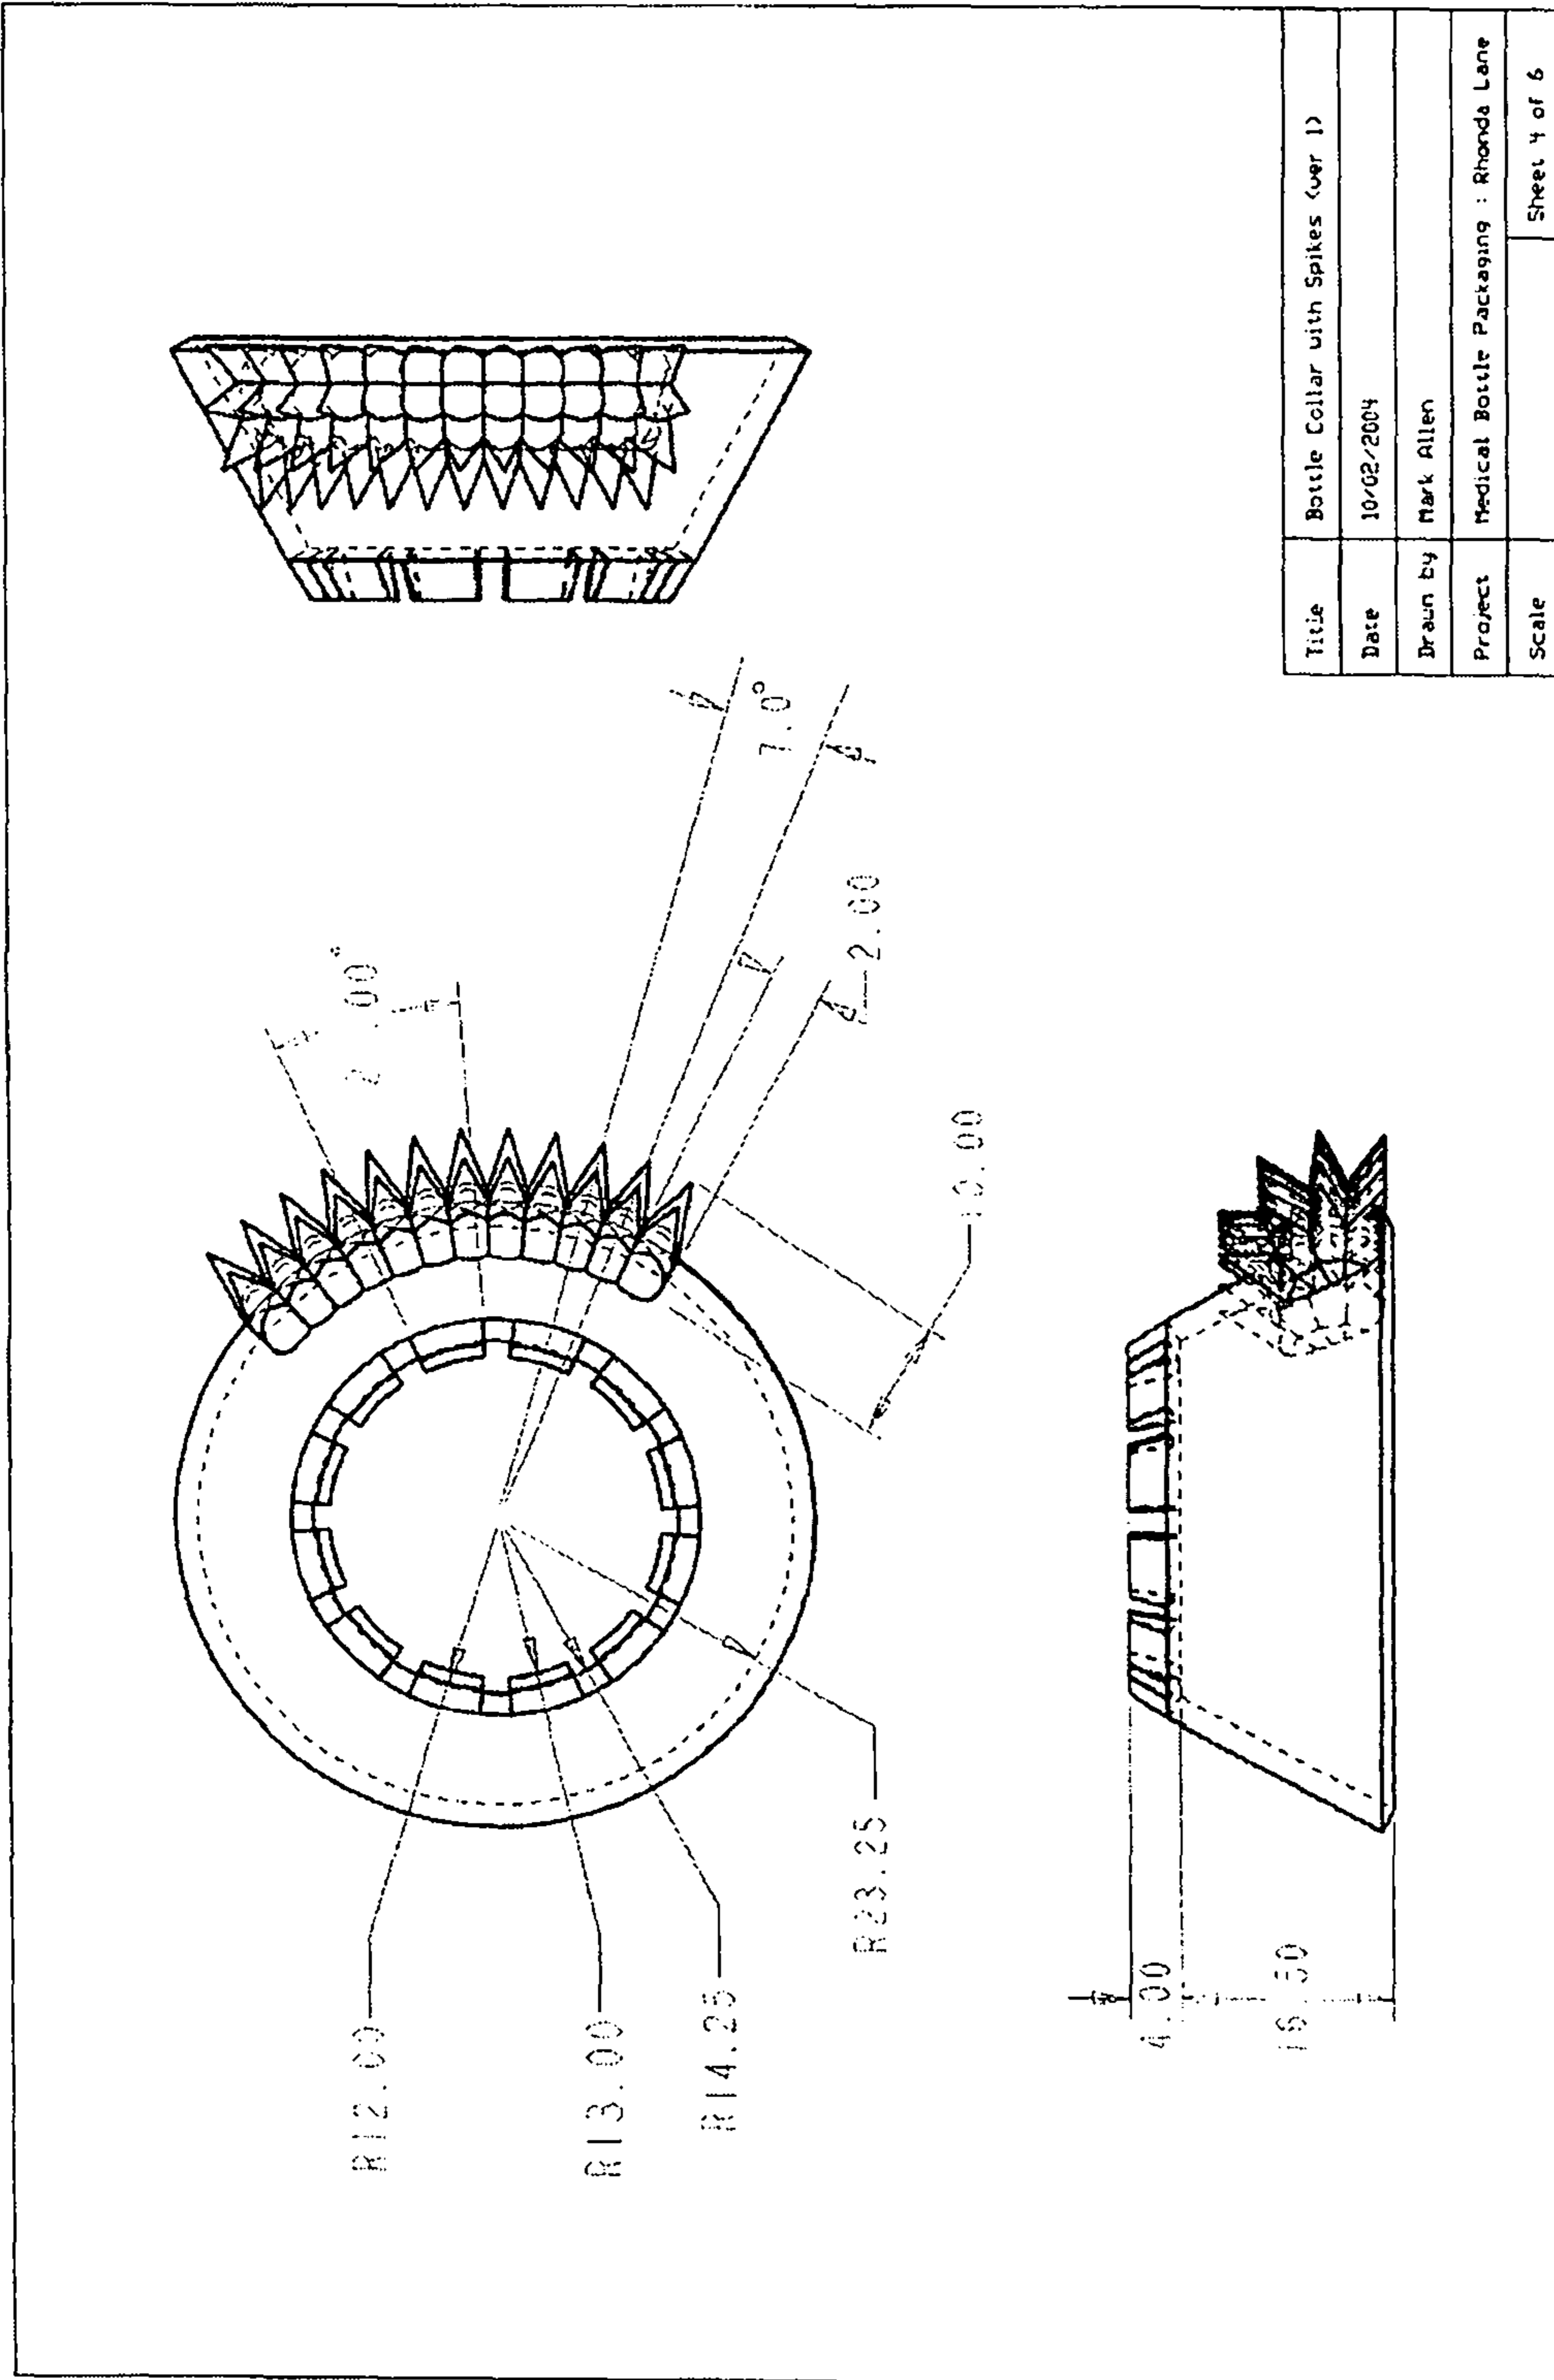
Pro- Engineer drawing of the drug identification collar with the haptic feature representing analgesic (pain relieving drugs)
